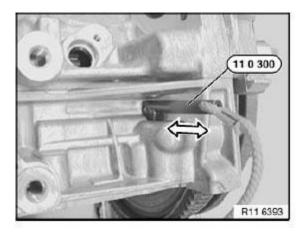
Sliding Crankshaft In Special Tool (11 0 300) Courtesy of BMW OF NORTH AMERICA, INC.
